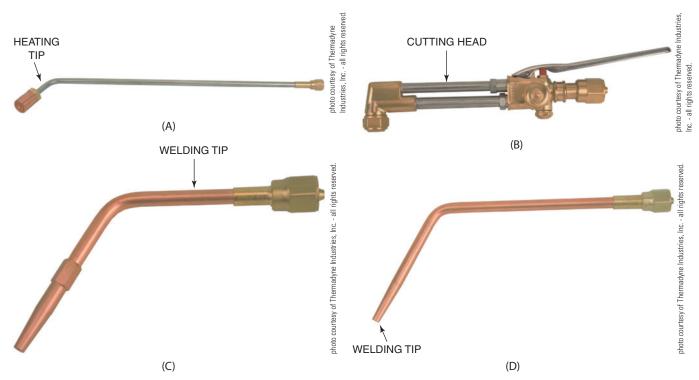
The attachments that are used for heating, cutting, welding, or brazing make the combination torch set flexible. (A) Heating tip, (B) cutting head, (C) two-piece welding tip, and (D) single-piece welding tip.
